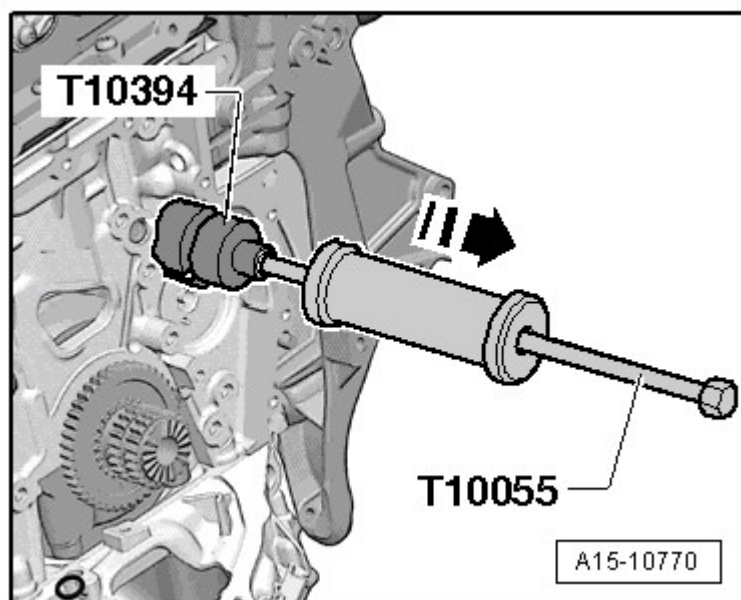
Identifying Installation And Operation Of Puller -T10055-
